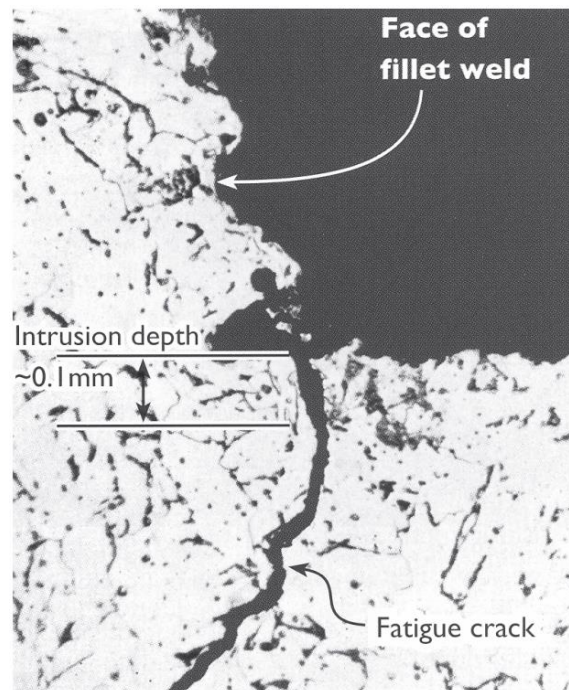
Intrusion at weld toe initiating a fatigue crack (Kolstein, 2007)
